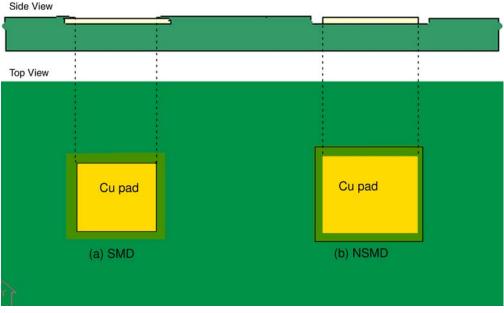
Solder Mask Defined Pad (a), and Non-Solder Mask Defined Pad (b)
